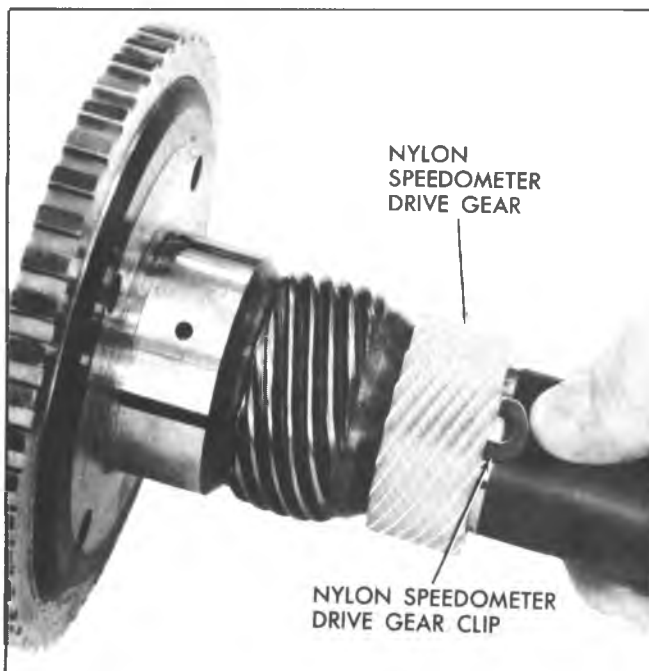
A-53C--Removing Nylon Speedometer Drive Gear
